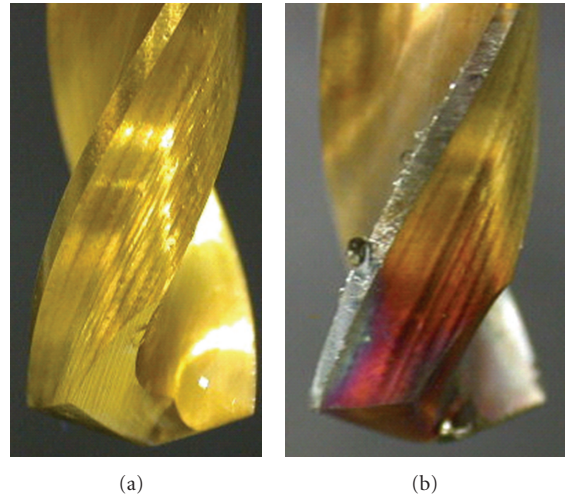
(a) Drilling tool as received. (b) Drilling tool after drilling five holes at 30 m/min.
